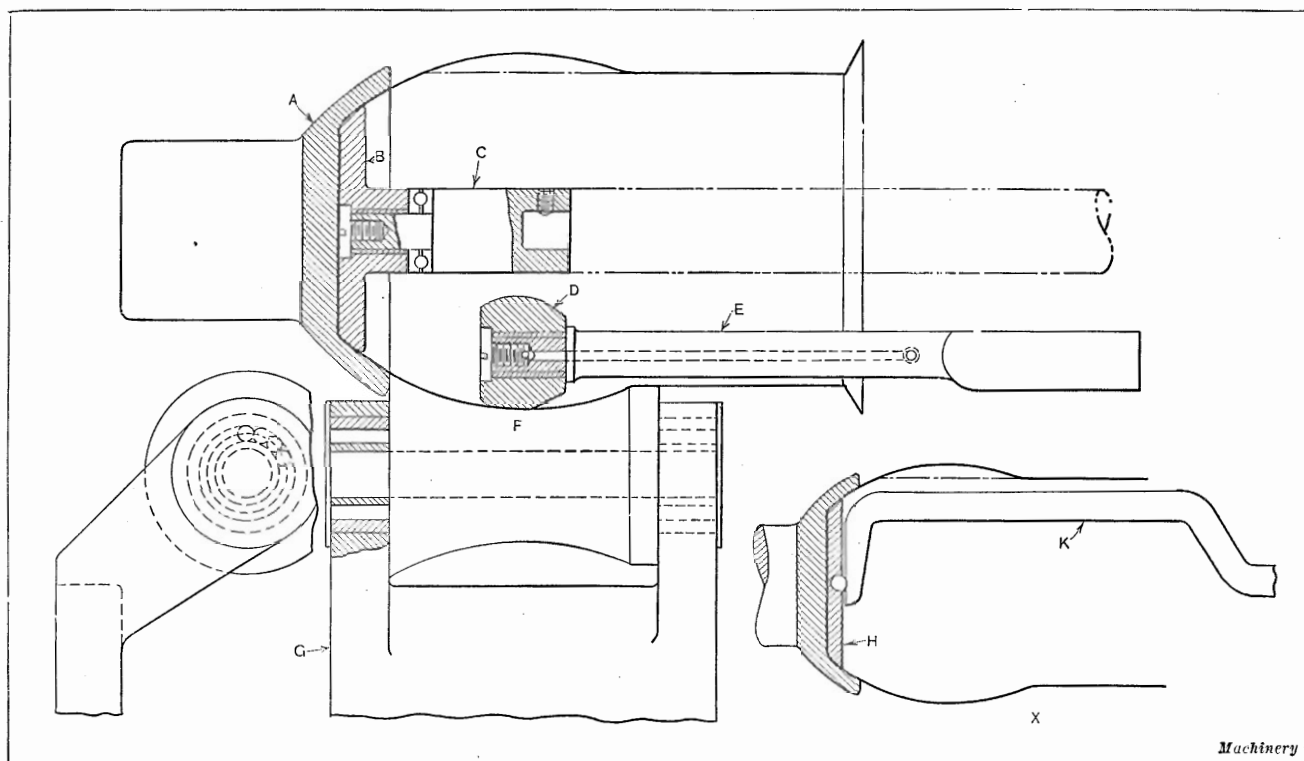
Tooling Arrangement for Spinning the Lower Part of a Steel Pitcher from the Inside
